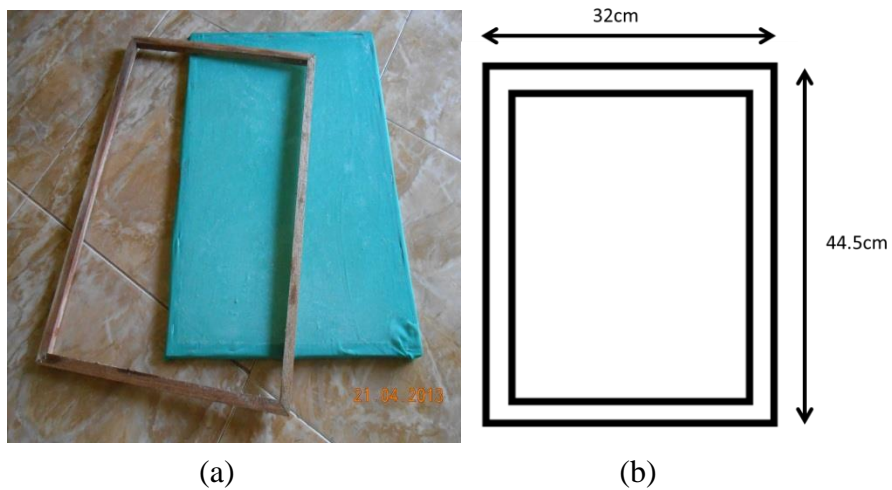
Mould and deckle (a) and dimension of mould and deckle (b)
